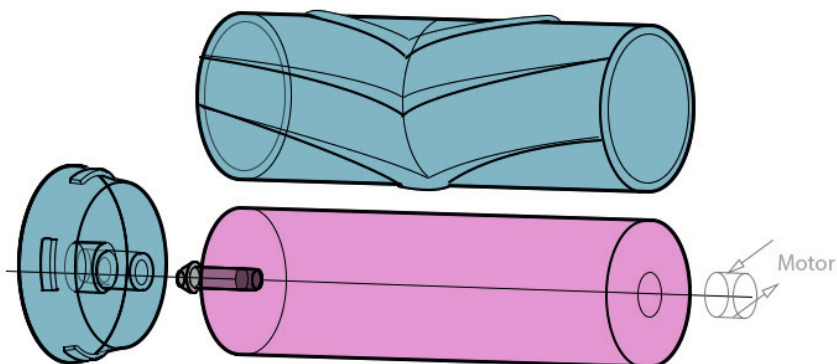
Exploded view of the secondary design concept (injection moulding). The adapted parts are shaded purple, the moulded but unaltered parts are blue, and the standardised components are light grey.
